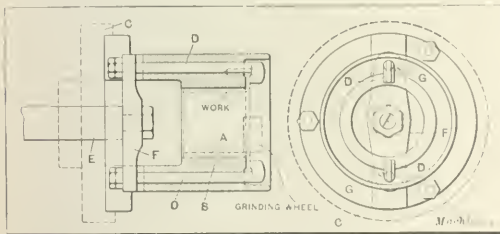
Recommended Method of holding Thin-wall Bushing for Internal Grinding to prevent springing out of Shape
